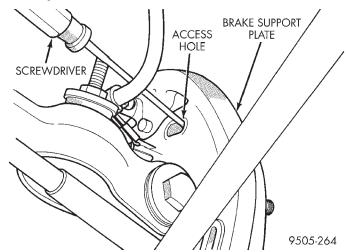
Backing Off Rear Brake Shoe Adjustment
